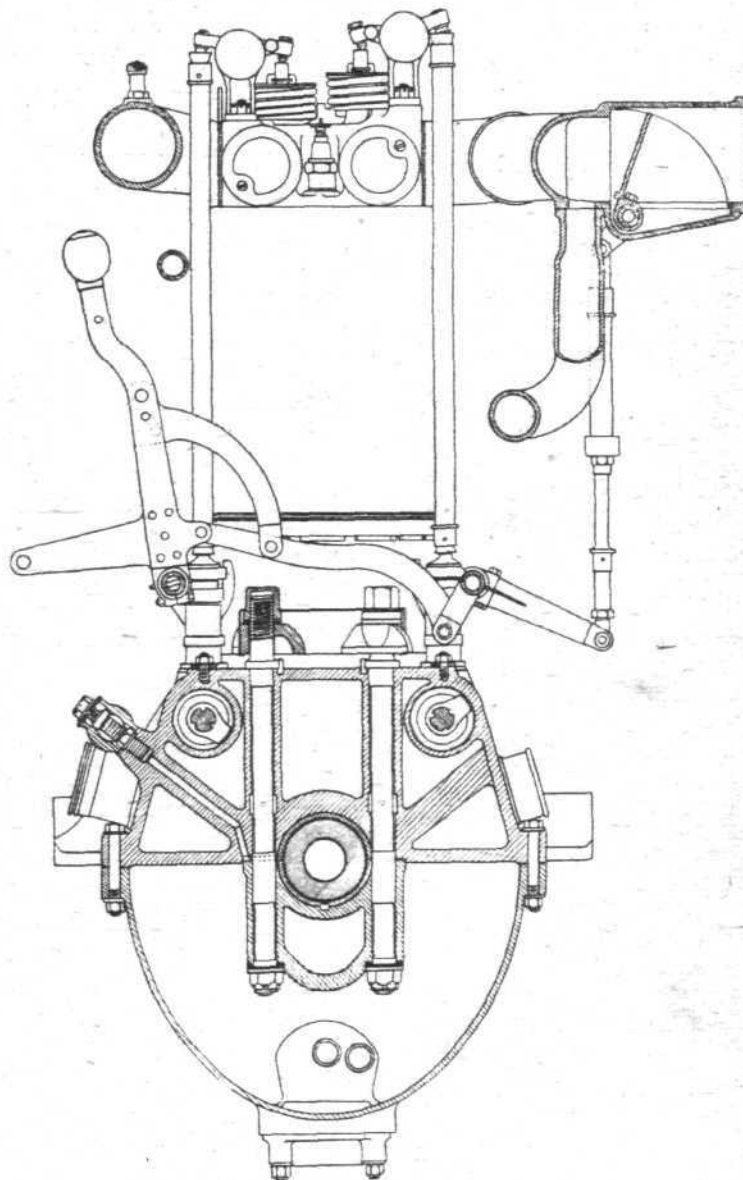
Cross-section through crankcase, showing method of holding cylinders and journal bearings.
